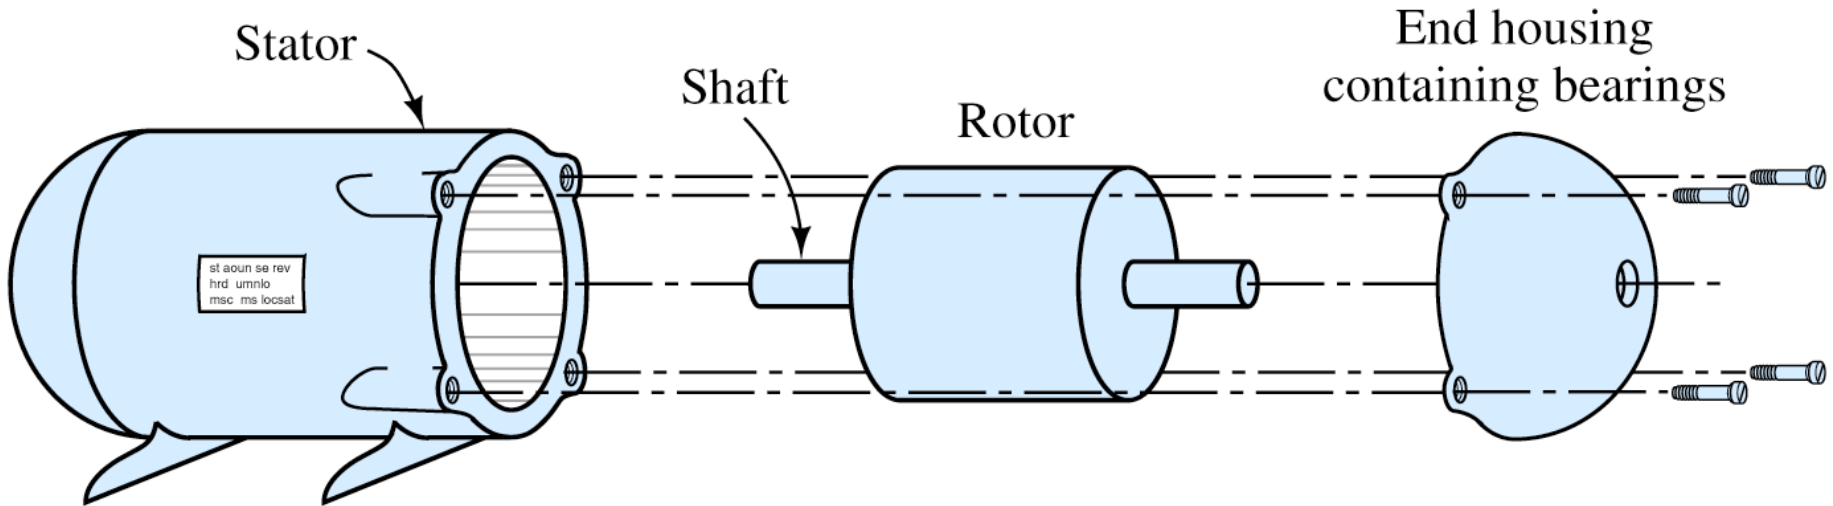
An electrical motor consists of a cylindrical rotor that spins inside a stator.
